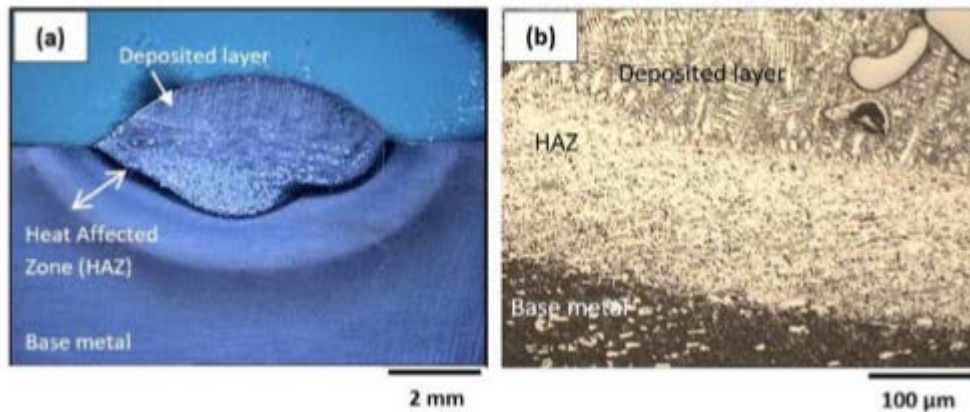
(a) Macrostructure, (b) Microstructure of one weld overlay bead with different zones visible. Manufactured with plasma Transferred Arc Welding (PTA) adapted from Tahaei et al. (2016).
